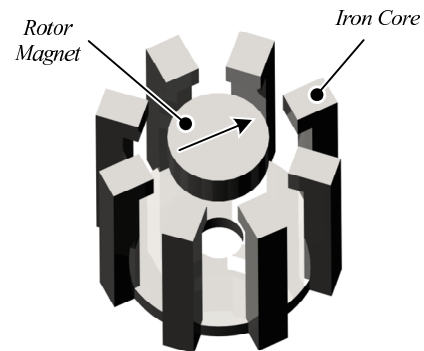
Basic setup of a bearingless slice motor for a centrifugal pump with a diametrically magnetized rotor
